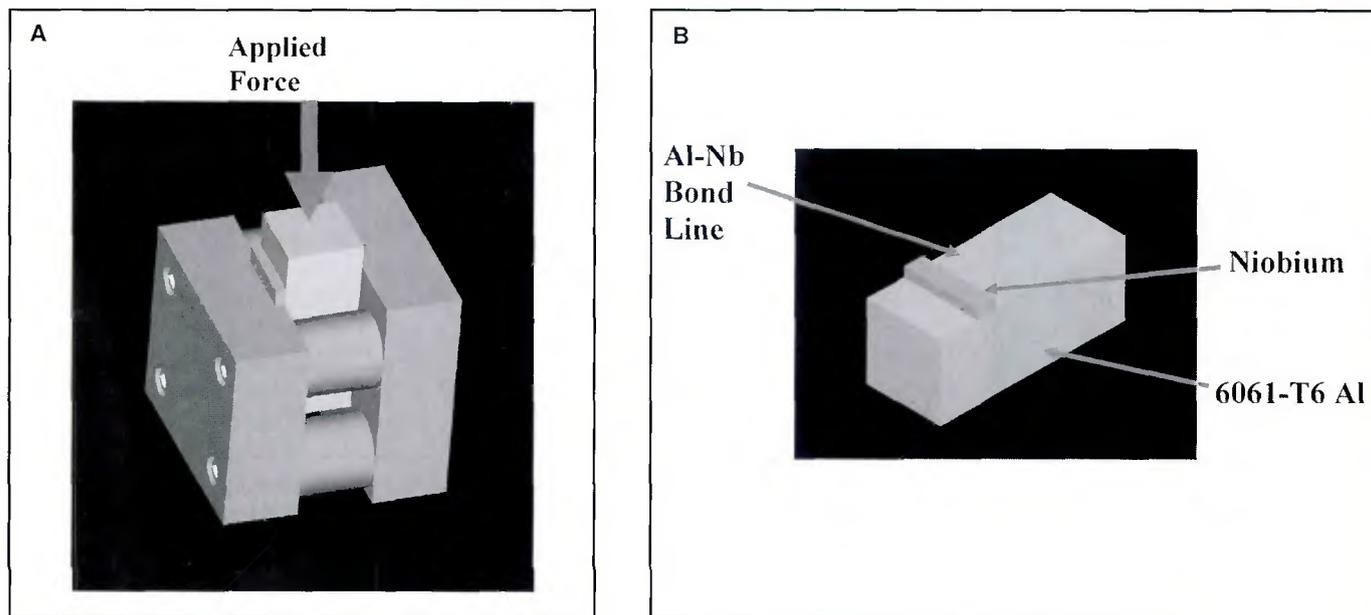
Schematic diagrams. A — The shear testing setup used to measure the shear strength of the Al-Nb explosion weld; B — the shear strength specimen.
